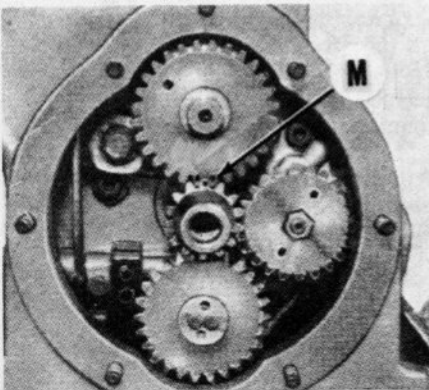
View showing location of timing marks (M) on crankshaft and camshaft gears.
